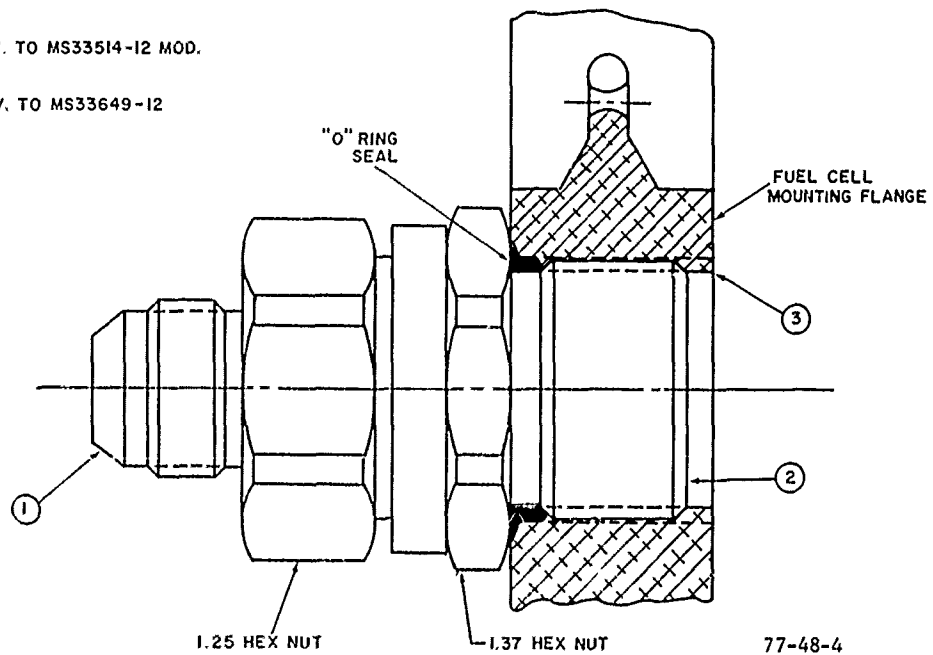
FRANGIBLE COUPLING MOUNTED TO FUEL CELL MOUNTING FLANGE
